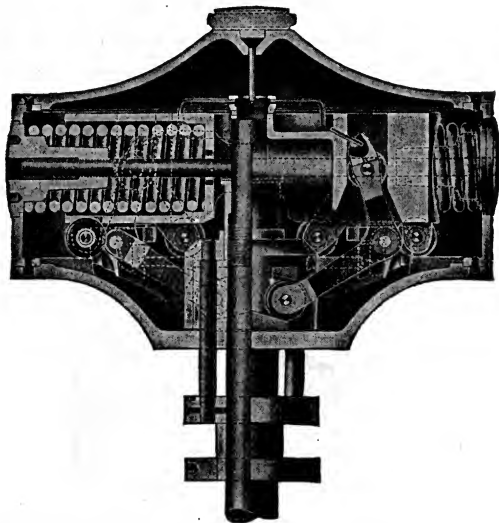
,433.—Interior view of Jahn's type speed governor used with De Laval multi-stage steam turbine. It is mounted upon a vertical shaft driven from the turbine shaft by worm gearing. The weights act directly upon the springs in such a manner that the spring pressure is not transmitted to the governor mechanism. The weight moves in a horizontal plane. The movement of the sliding sleeve on the spindle is effected by bell cranks engaging both the weights and the sleeve through roller bearing connections, with races set at such angles that the movement of the weights due to centrifugal force is transmitted in such a manner that the force exerted by the sleeve is practically constant at each position of its travel. The oiling of the upper pins and slides within the governor casing is effected by an oil cup on top, which can be filled while in motion. The lower pins and slides move in a bath of oil, and any overflow oil is utilized in lubricating the spindle sleeve. The governing weight, springs and the entire mechanism are protected from dust and moisture by the enveloping case. The movement of the sleeve operates the governor valve through a simple system of links and levers, containing a spring link which prevents any injury to the governor valve through overtravel of the governor.
